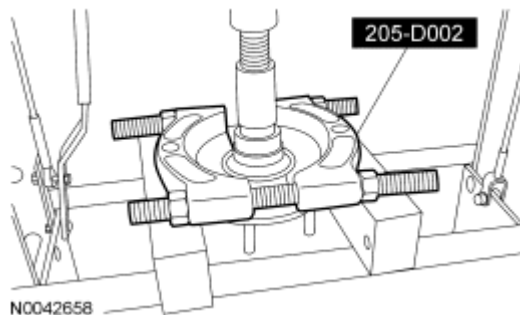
Pressing Inner Wheel Bearing Race From Wheel Hub Using Special Tool (205-D002)
